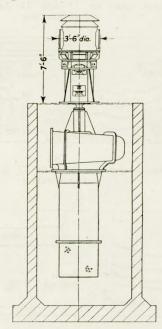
140 h.p. motor driven pump with 1,480/285 r.p.m. epicyclic gear
